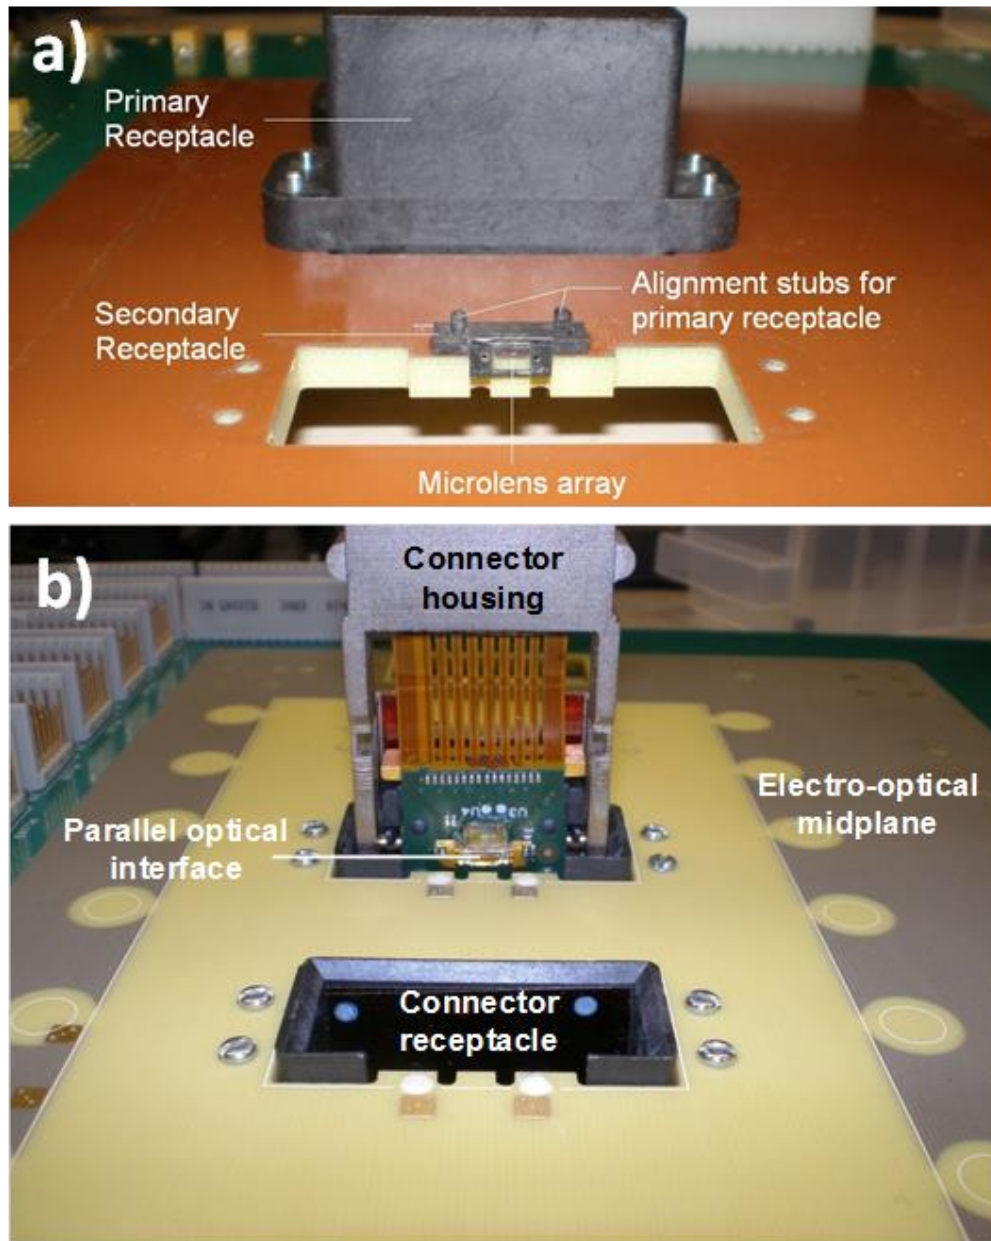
a) Assembly of primary receptacle and secondary receptacle in optical engagement slots, b) Pluggable optical connector prior to engagement with OPCB. Parallel MT compliant optical interface is visible as connector starts to engage with connector receptacle
